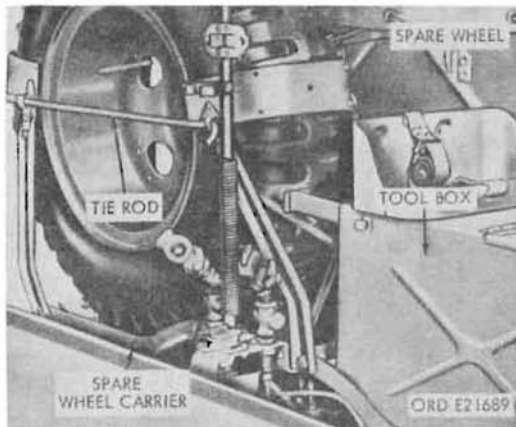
Spare wheel carrier mounted to rear of cab - M48 truck
